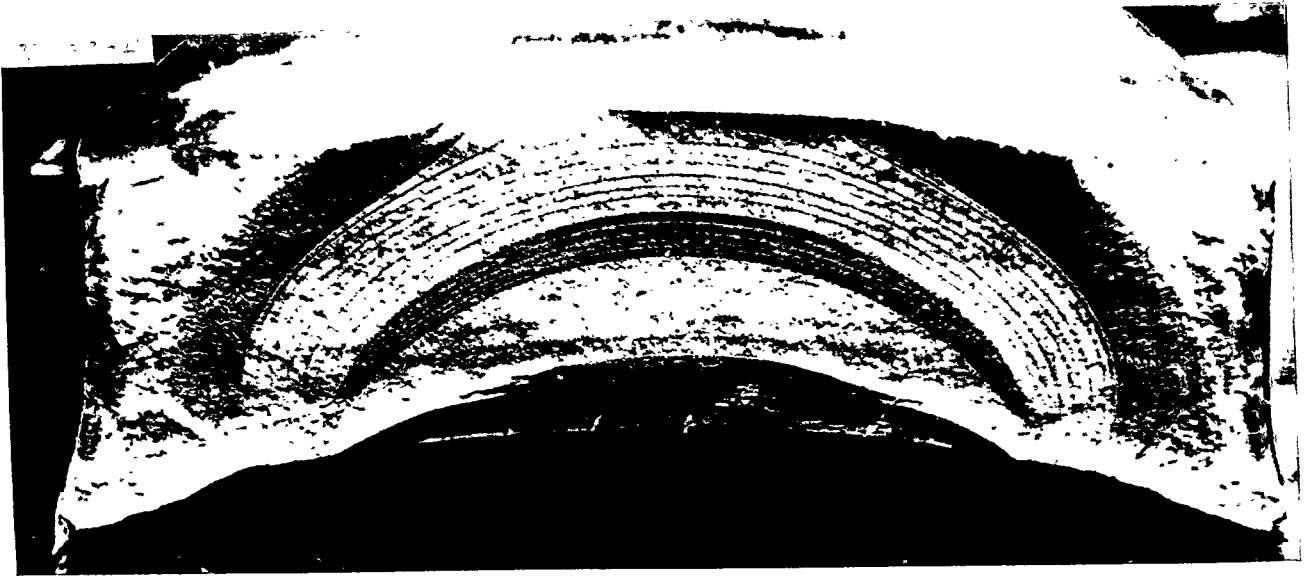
Fractured surface of the large-scale specimen 33 with surface crack.
